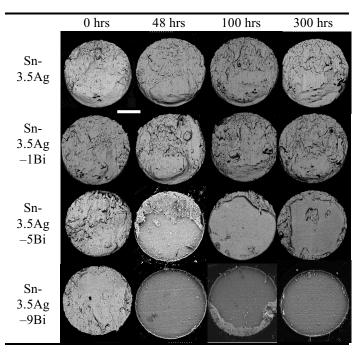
SEM fractographs observed on the sheared surface of the Sn-3.5Ag-Bi solder bumps aged at 150°C.
